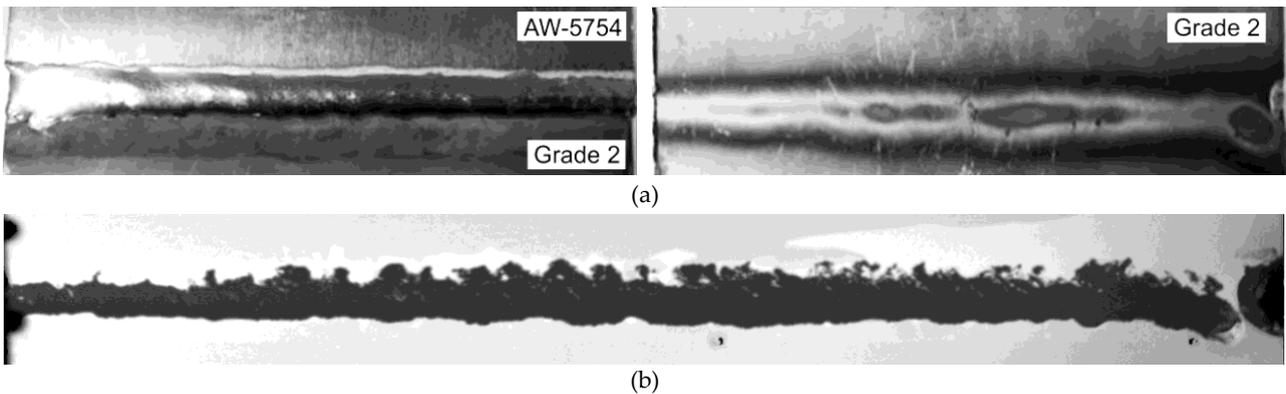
Braze welded joint Titanium Grade 2 + aluminum AW-5754, brazing consumable AlSi5: a) both sides of the joint; b) C-scan of the joint
